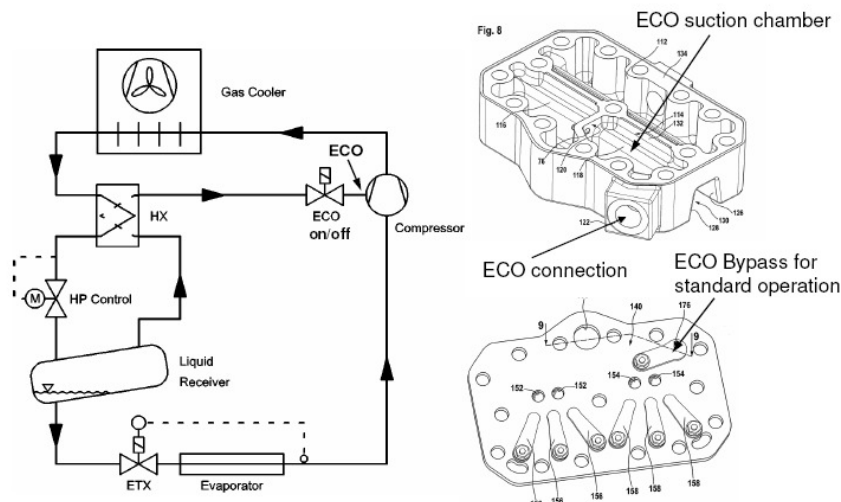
Simplified sketch of a parallel compression system and details on cylinder head and valve plate design
